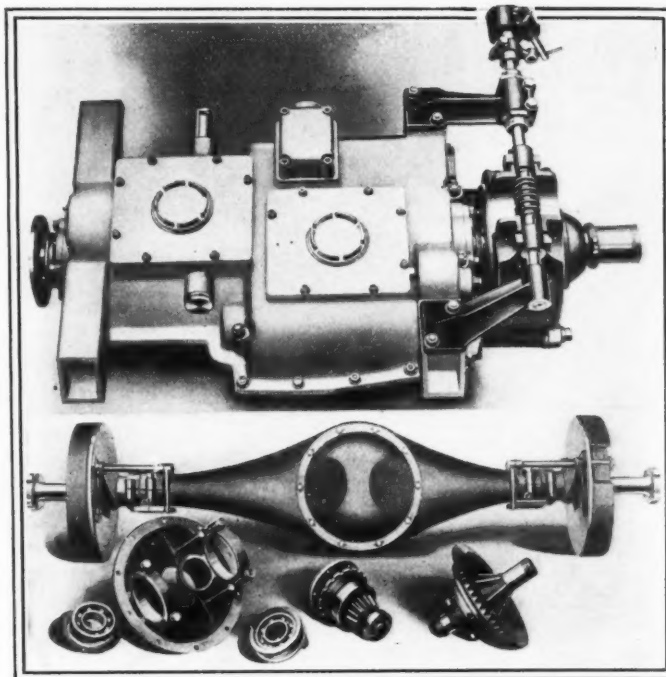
This shows the housing for the clutch, gearset and rear axle. The clutch and gearbox housing are commendable for the large cover plates that are provided, thus allowing an opening that will permit of the hand passing readily into the gearbox. The rear axle and differential housing is a unit and is of pressed steel. A partial disassembly showing some of the bearings is given
